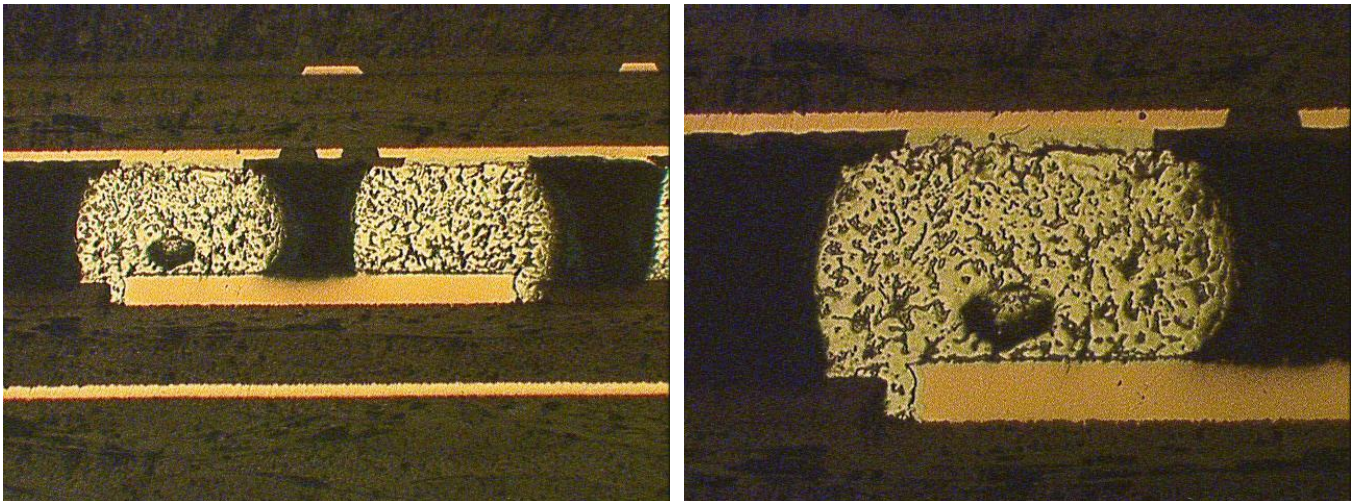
CSP-100 Solder Joints, Board 7, Component U37, SnPb/SnPb, Failed @ 2837 Cycles
